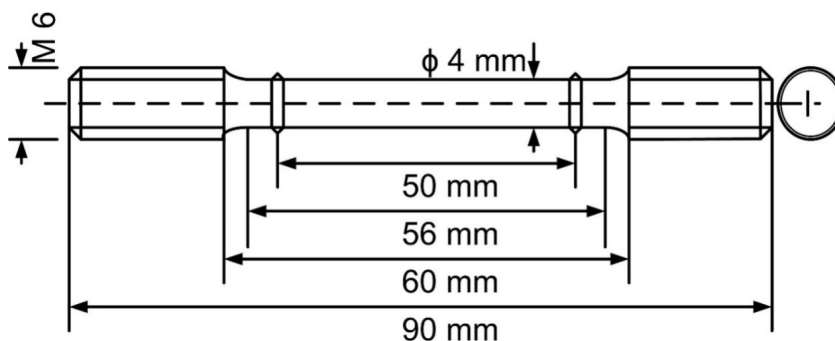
Schematic of creep test specimen for weld metal
